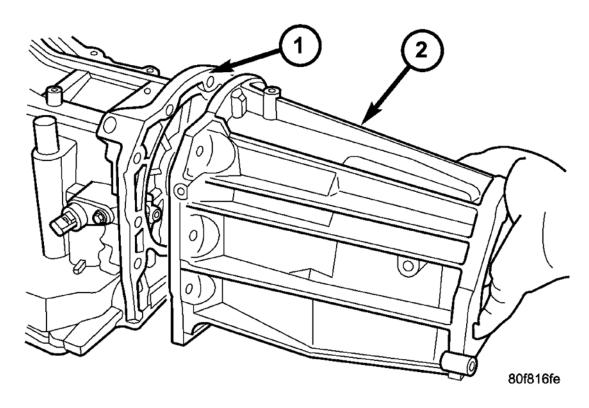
Installing Adapter Housing Onto Transmission Case Courtesy of CHRYSLER LLC
